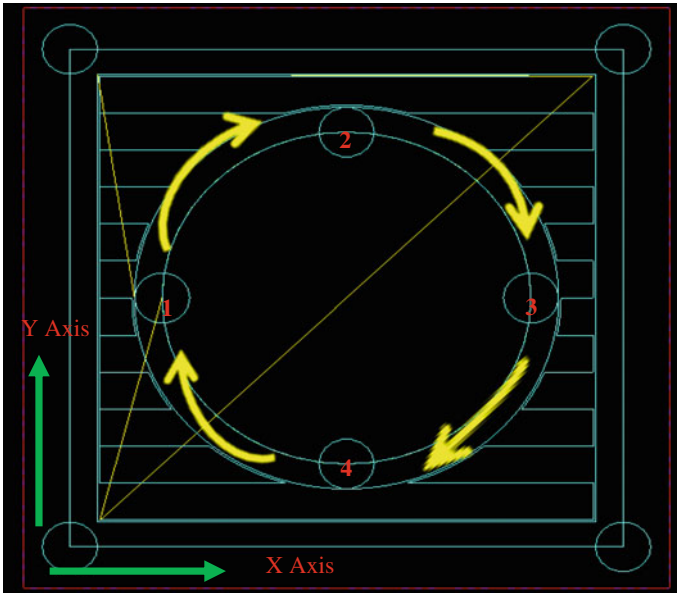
Toolpart strategy for the zigzag cutting method—circular part
